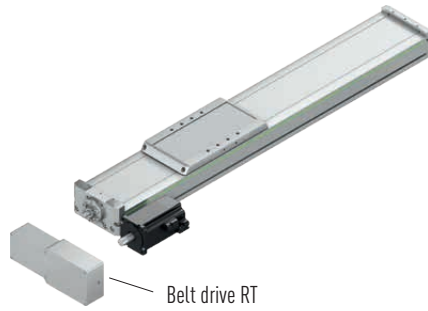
Motor adapter for linear modules HM-S with belt drive
